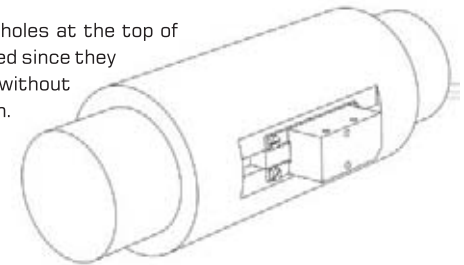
An alternative way of mounting the Piezo LEGS housing (directly against the component to be moved).
